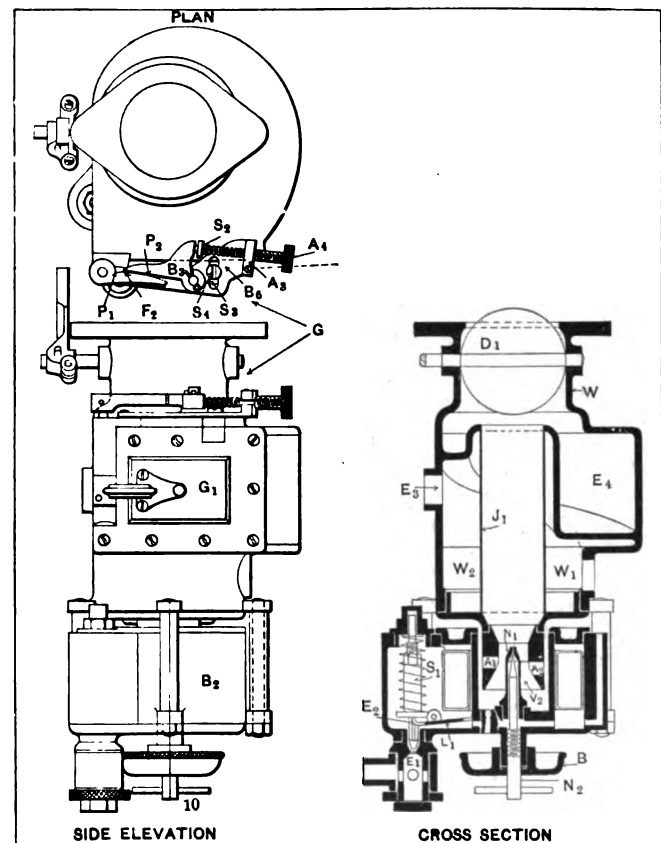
Plan, elevation and section of the Vortex carbureter showing the Venturi tube, tangential ports and snail-like chamber
